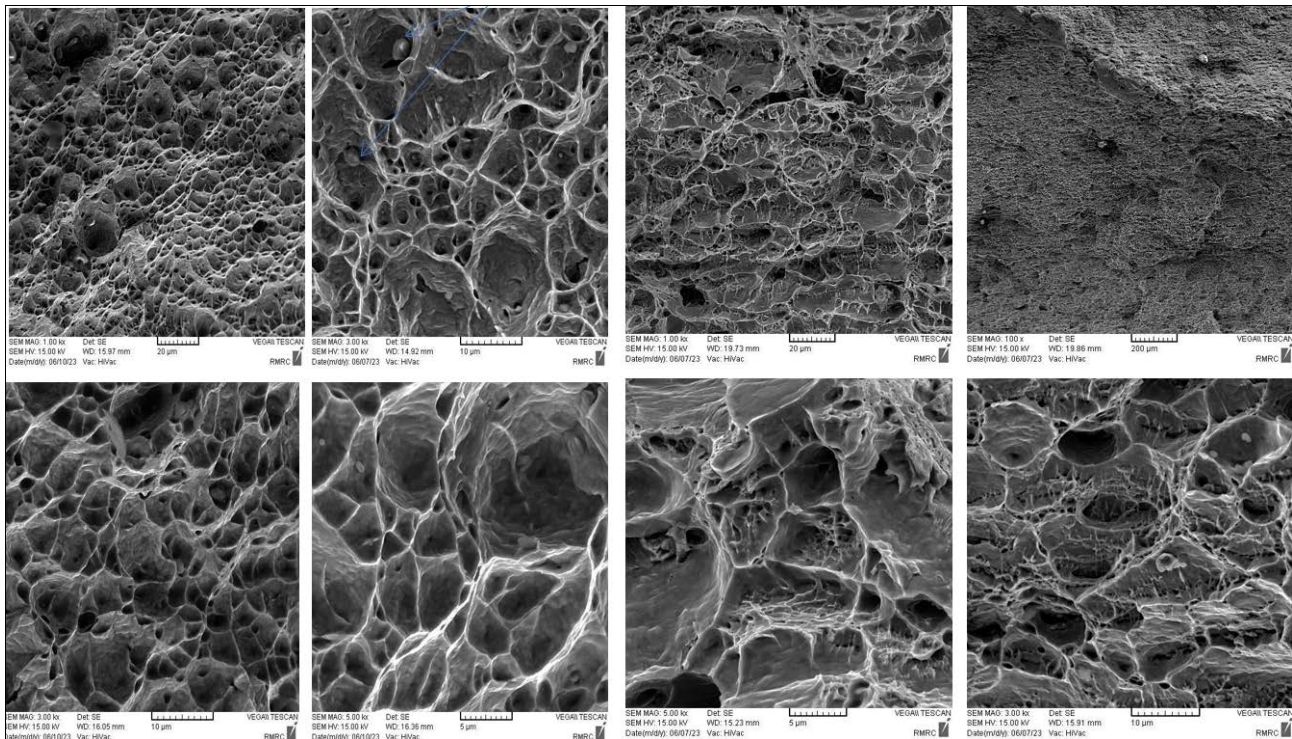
and 19: SEM Fractographic Analysis of Welded Samples Using ER 309L and ER NiCrMo-3 Filler Metals (These scanning electron microscope (SEM) images illustrate the fracture surfaces of welded samples. The fracture morphology in ER 309L welds (Figure 18) shows larger and shallower voids, indicating a ductile fracture in the carbon steel region. In contrast, the fracture surfaces in ER NiCrMo-3 welds (Figure 19) exhibit a higher density of finer and deeper voids, signifying a softer failure mode in the stainless steel region).
